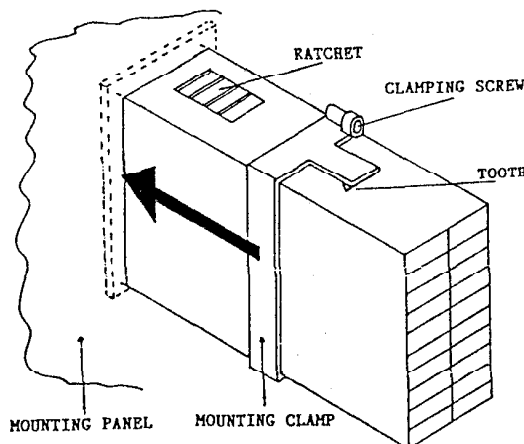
PANEL-MOUNTING A CONTROLLER
